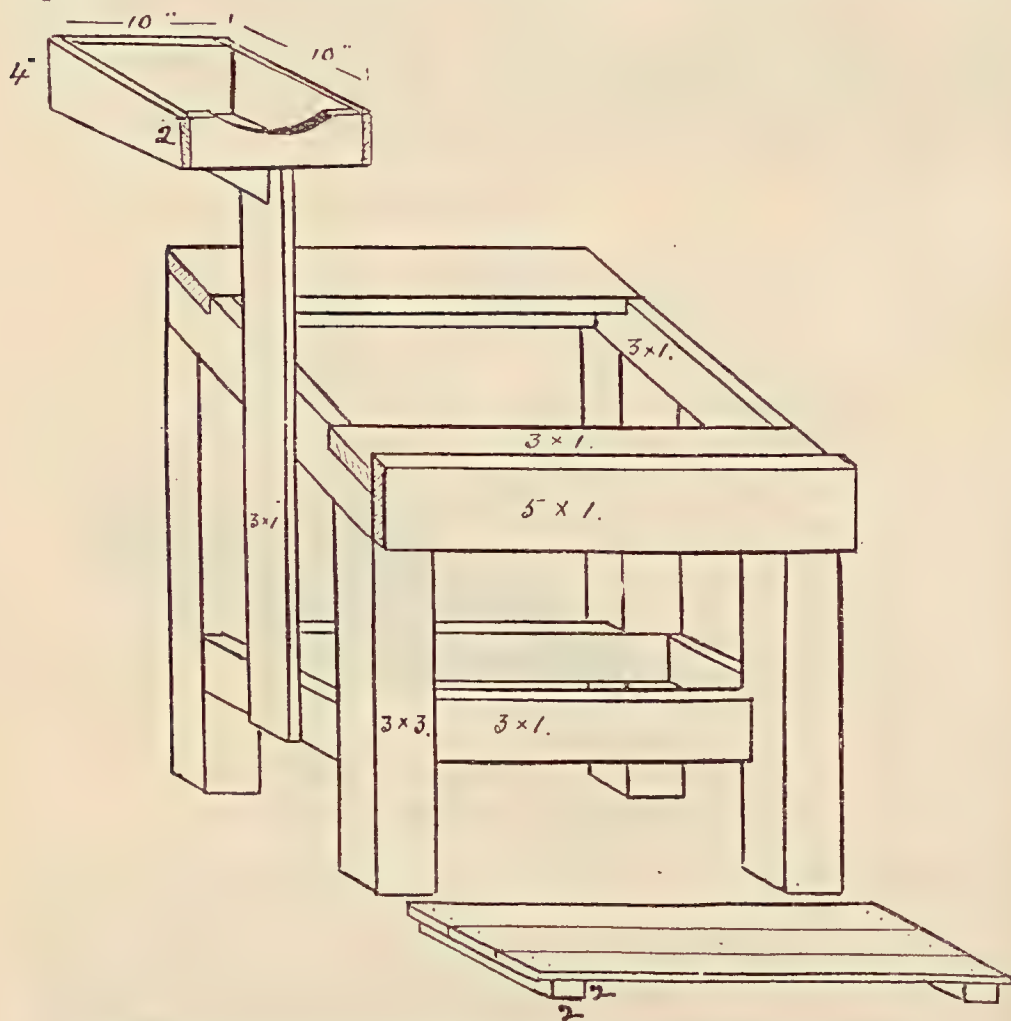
(Fig. 6).—FRUIT PACKING BENCH AND SPRING BOARD.
